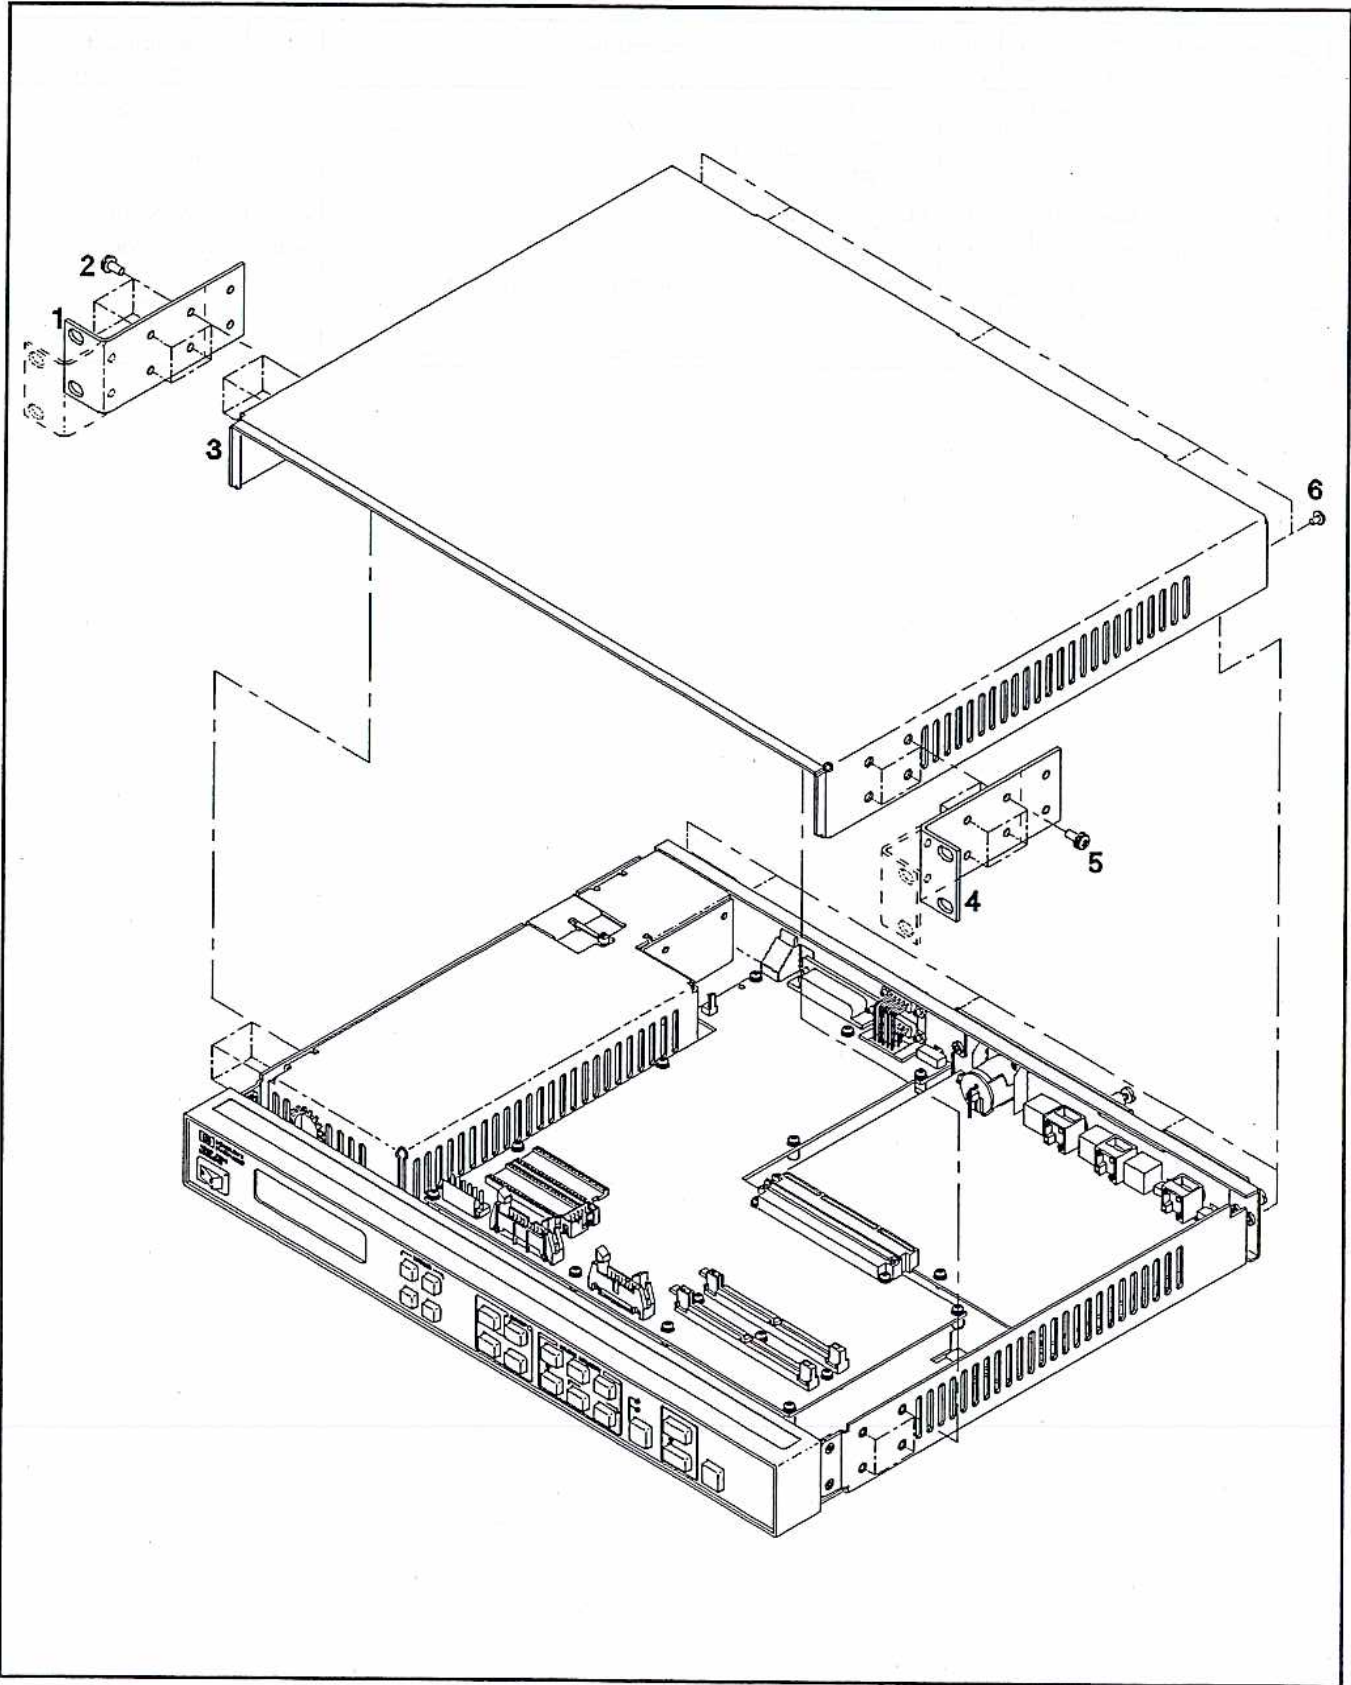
Cover Illustrated parts Breakdown—HP VidJet Pro
